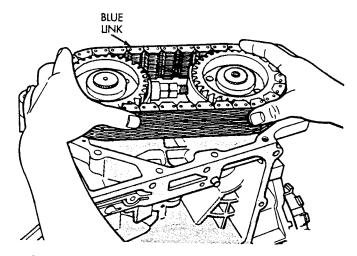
Remove Chain and Both Sprockets as an Assembly
